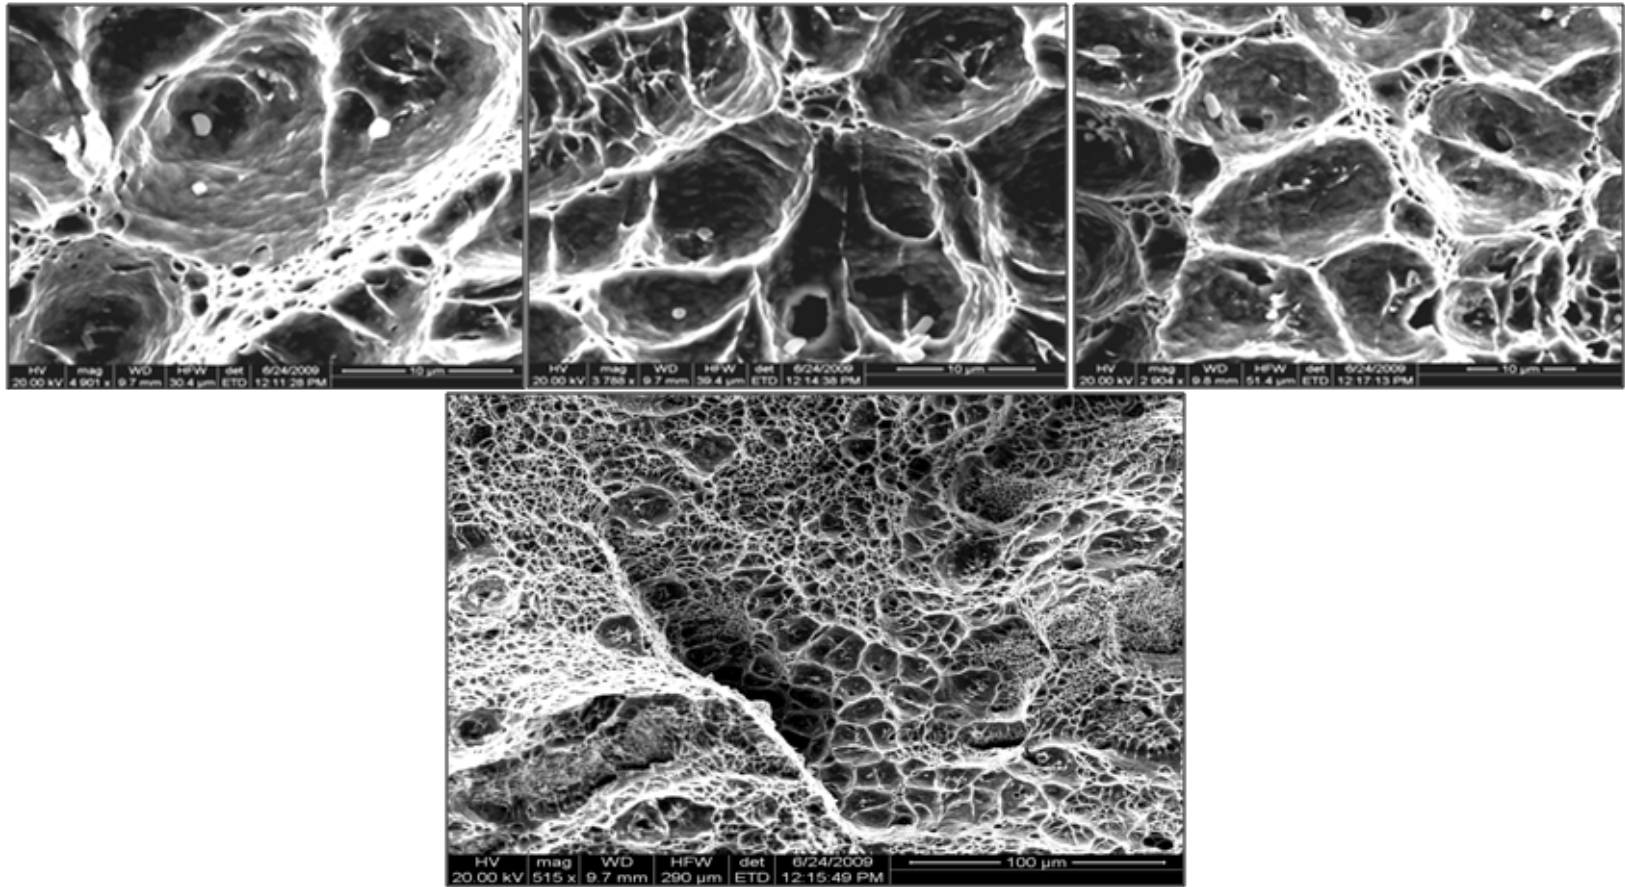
More fracture surfaces taken from the broken sharp notched bar sample 3T4-R.
